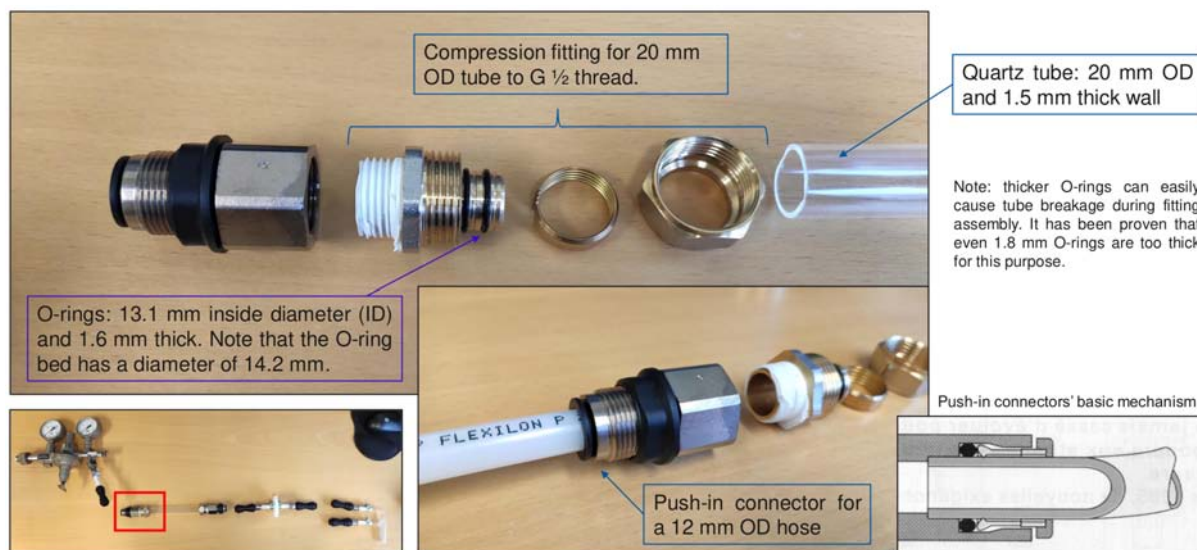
Detail of the connection between the quartz tube and the gas hose. Compression fittings with suitable o-rings are used in the tube side, which are then screwed to a push-in connector where the hose is inserted.
